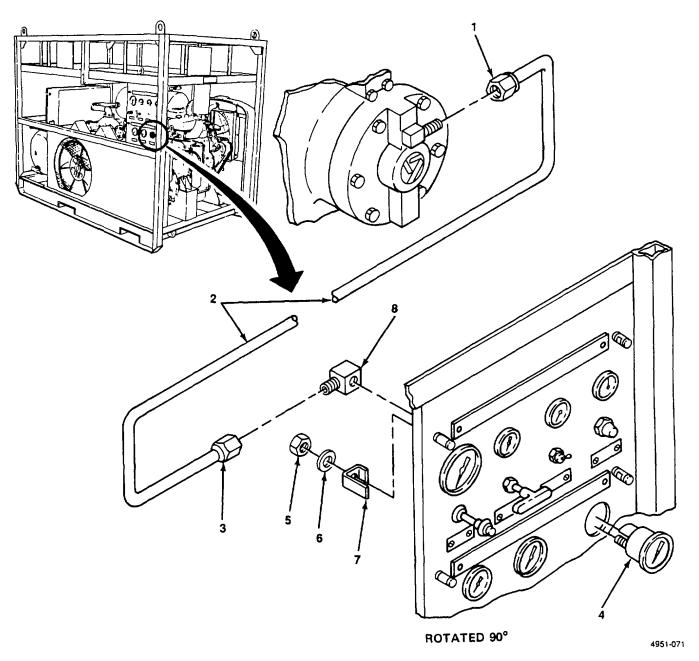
Oil Pressure Gage Compressor, Replace.
